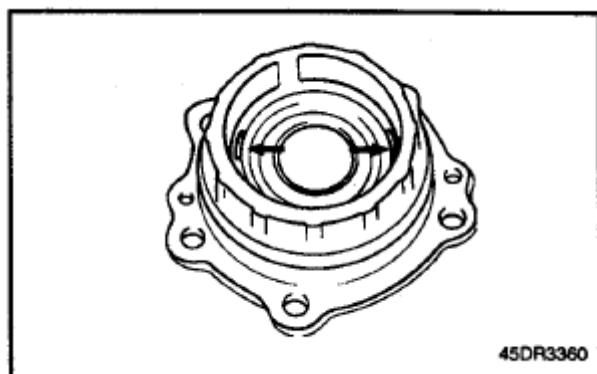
Identifying Solder Area On Differential Bearing Retainer Outer Race
